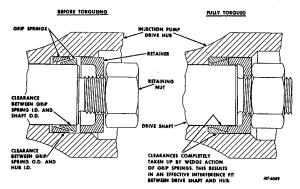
Proper Assembly of Injection Pump Drive Shaft Grip Springs and Retainer
